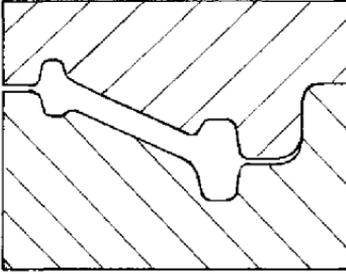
Die layout for hammer forging die. (From Ref. 17.)
